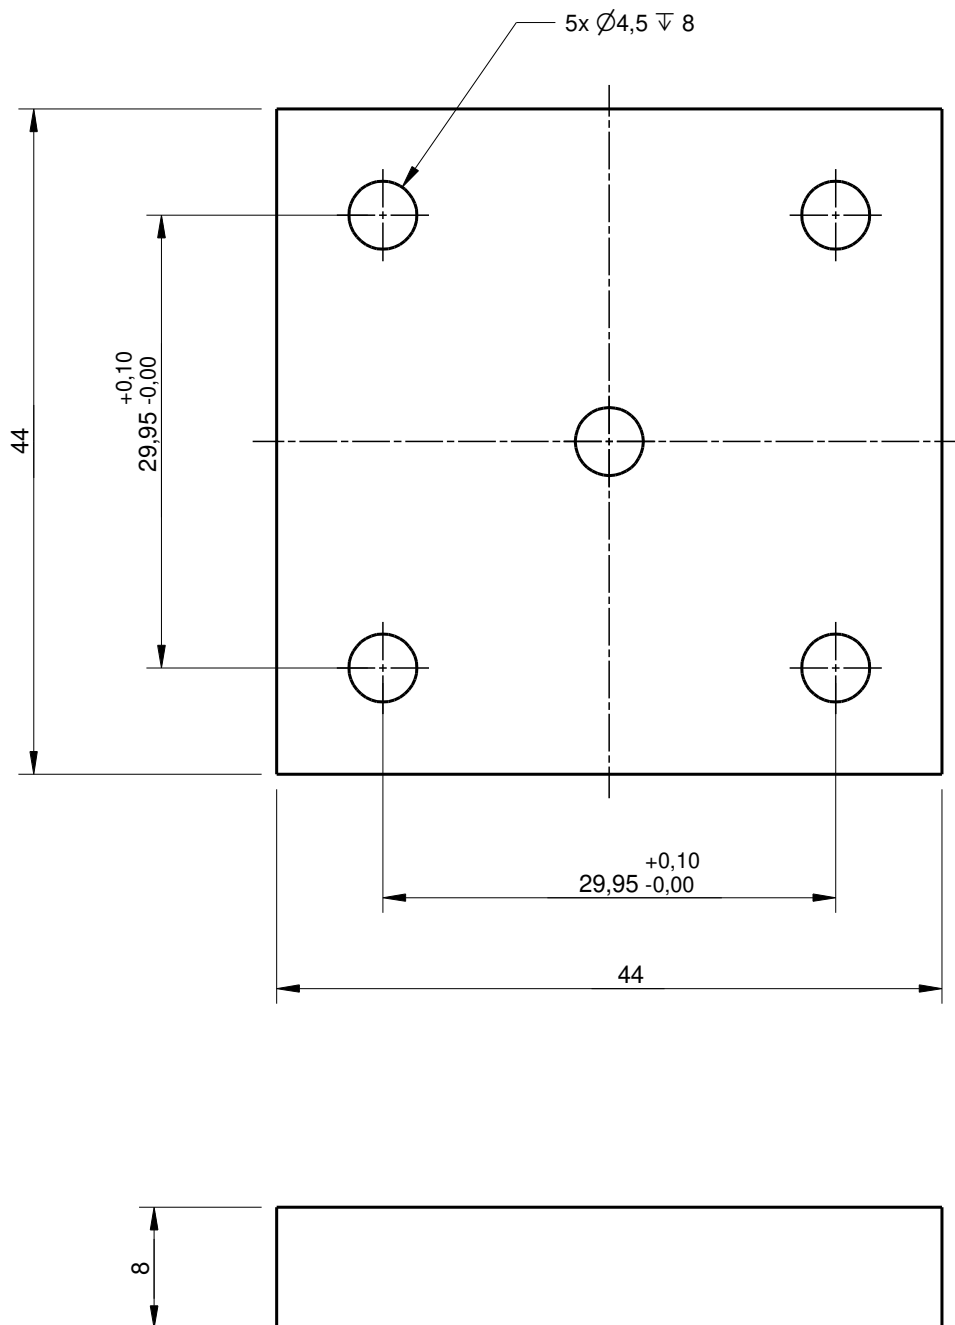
CAD design for top piece of bonding apparatus with single plunger. Sizes are in mm. Design created by Montfort Laser and Prof. Michael Mayer.
